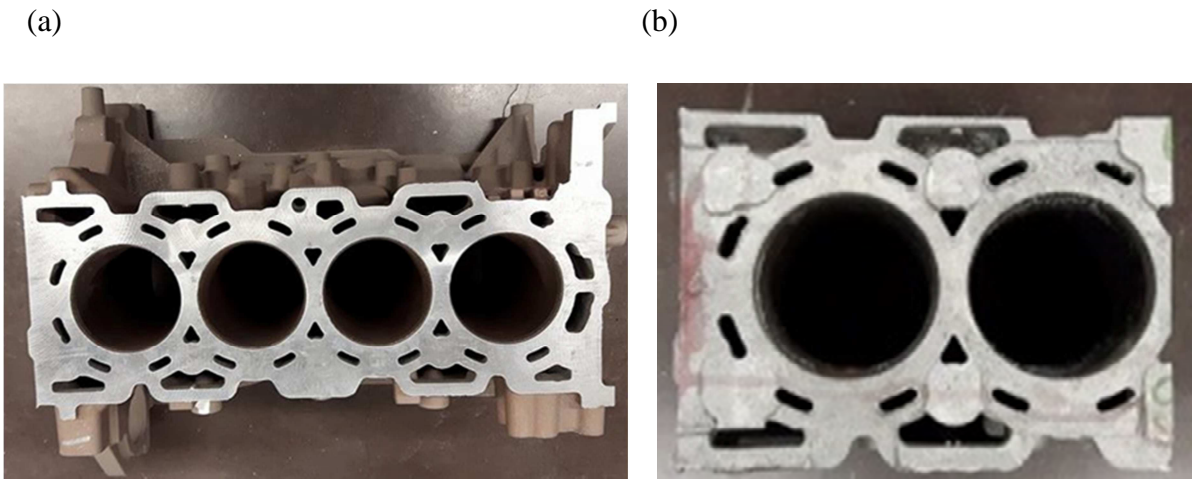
I4 Engine blocks (a) Four-cylinder engine block (before cutting) (b) Two-cylinder engine block (after cutting)
